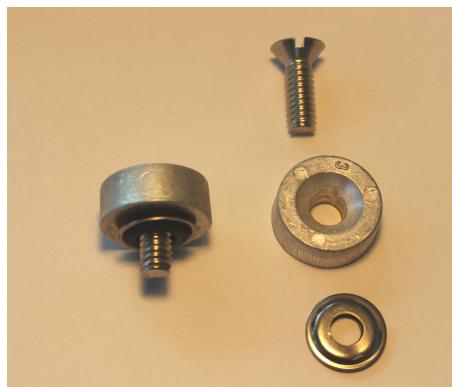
Sacrificial aluminum anode assembly. Assembled on left, separated on right.
